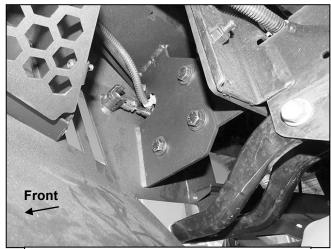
Remove seal from sensor. Slide Foam Sealing Washer over end of sensor (arrow)
